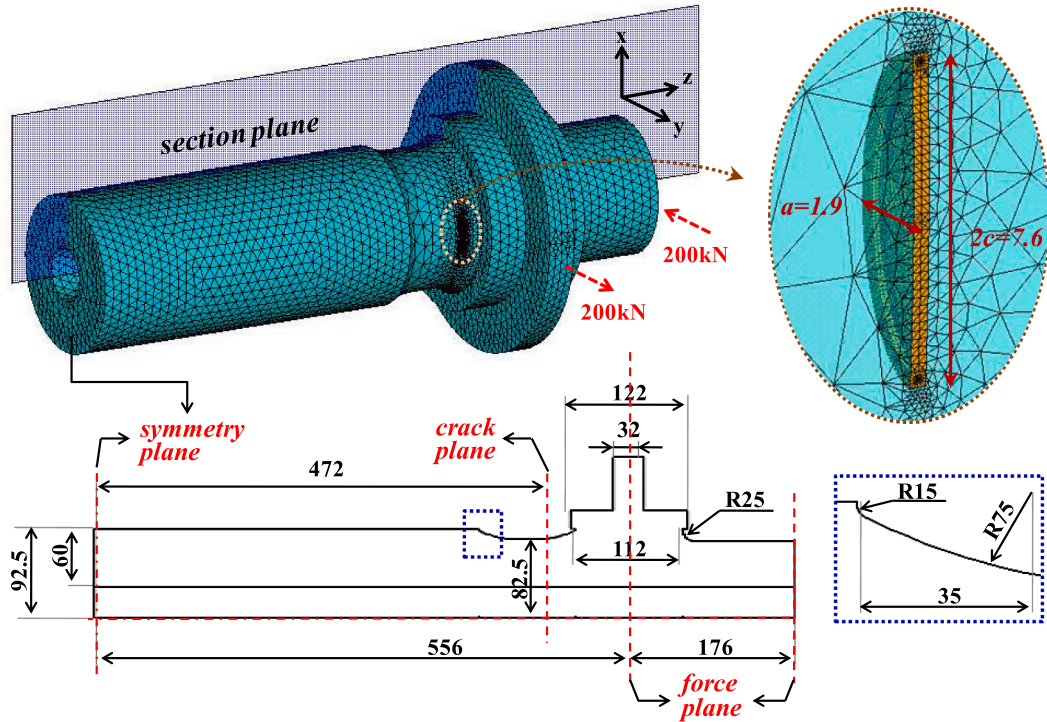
Detailed dimensions of hollow shaft with a zoomed view of the finite element model containing the initial crack.
